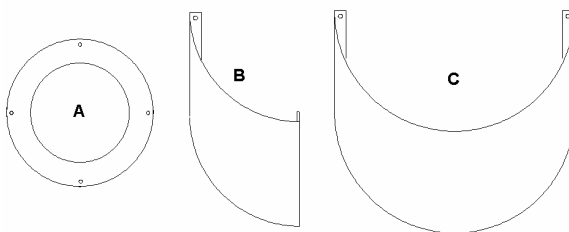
Parts for the recasting: A bottom ring plate; B $\frac{1}{4}$ section; C $\frac{1}{2}$ section.
